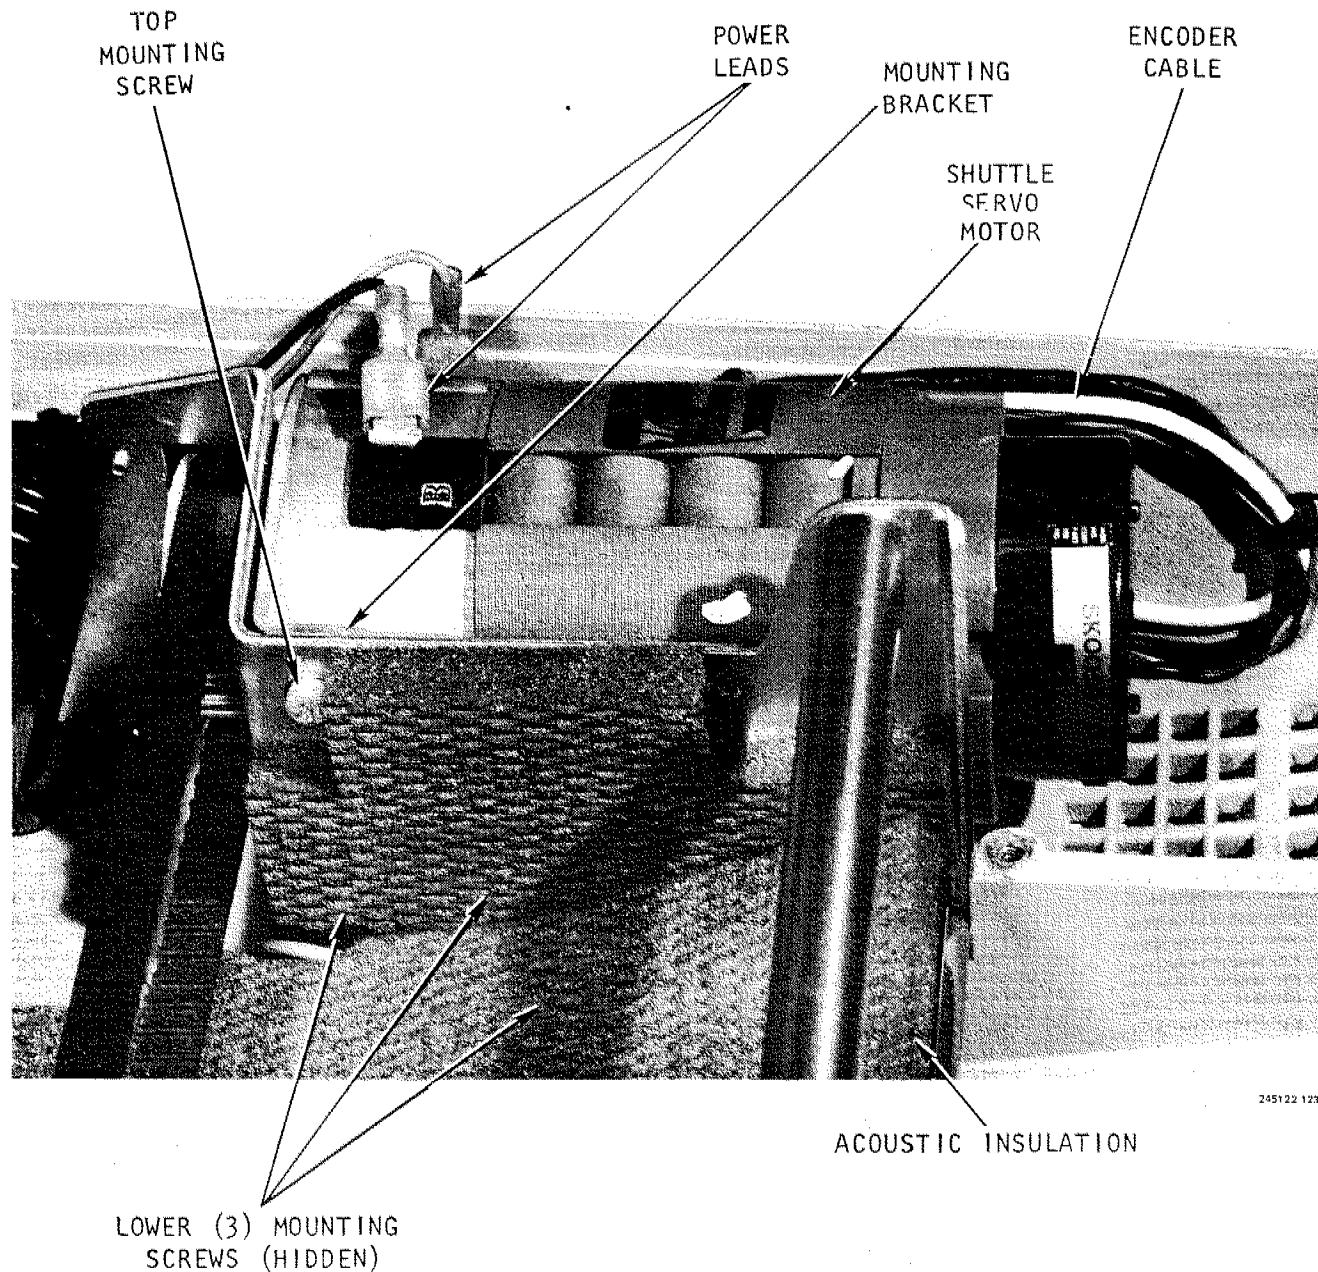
M-Series Shuttle Servo Motor (Shuttle Drive Control Assembly) Removal/Replacement
